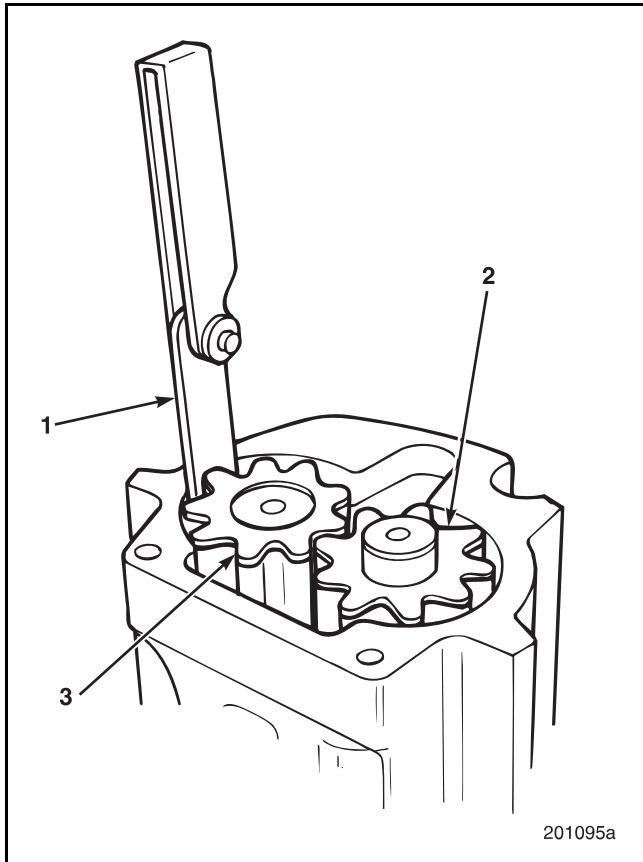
Oil Pump Driving/Idler Gear Assembly Side Clearance Check
